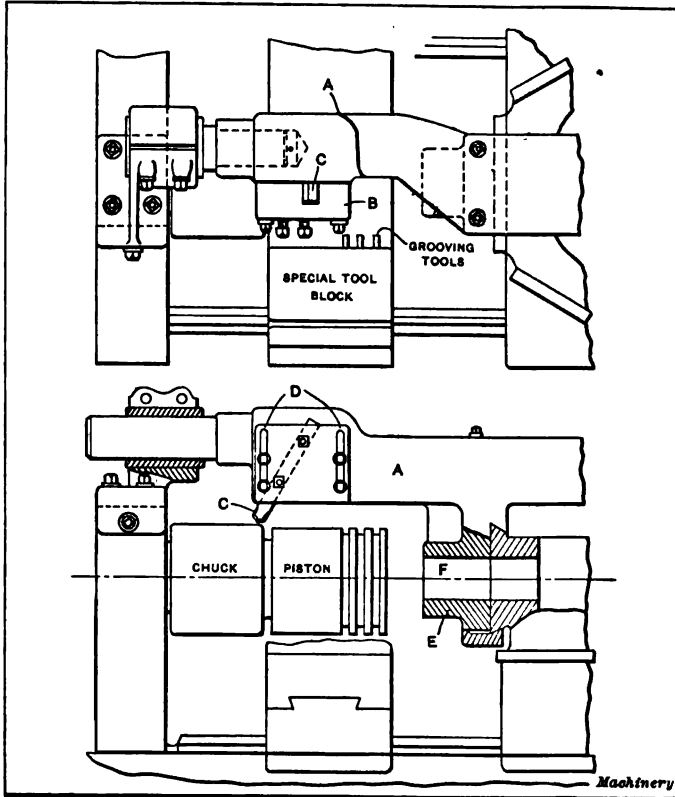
Piston Turning Tool having Adjustable Tool-block
